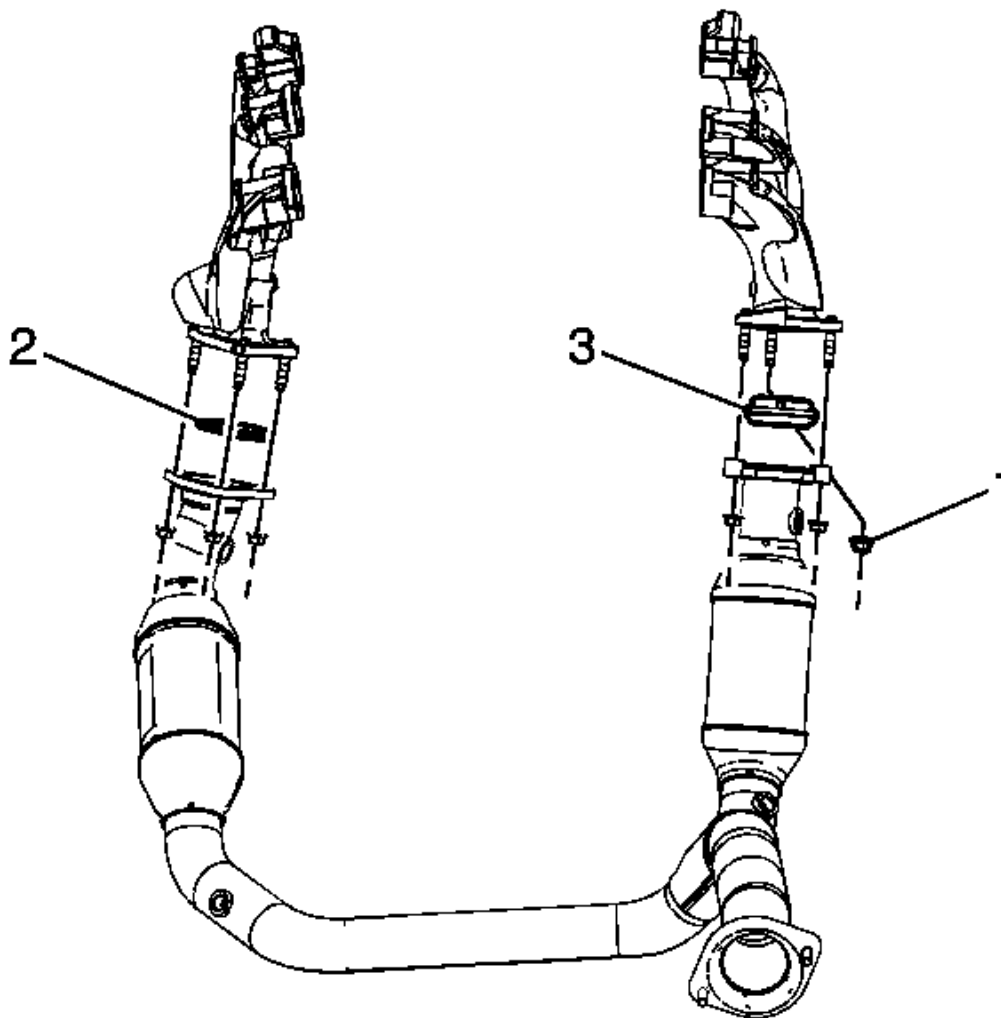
View Of Exhaust Manifold Nuts & Exhaust Seals
